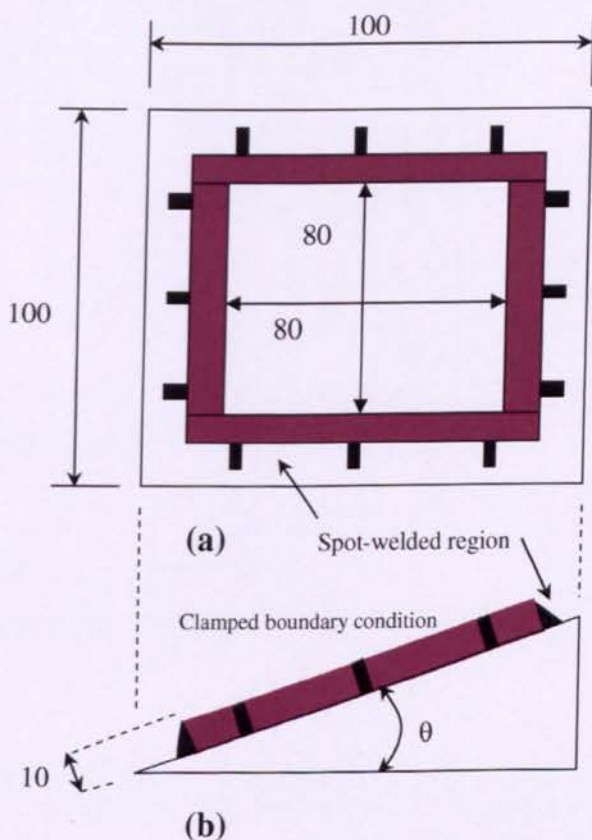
Wedge-shape base for off-axis crushing tests, at off-axis angles of $\theta = 5^\circ$, 10° , 20° and 30° , a) plane view, b) side view (All dimensions in mm).
